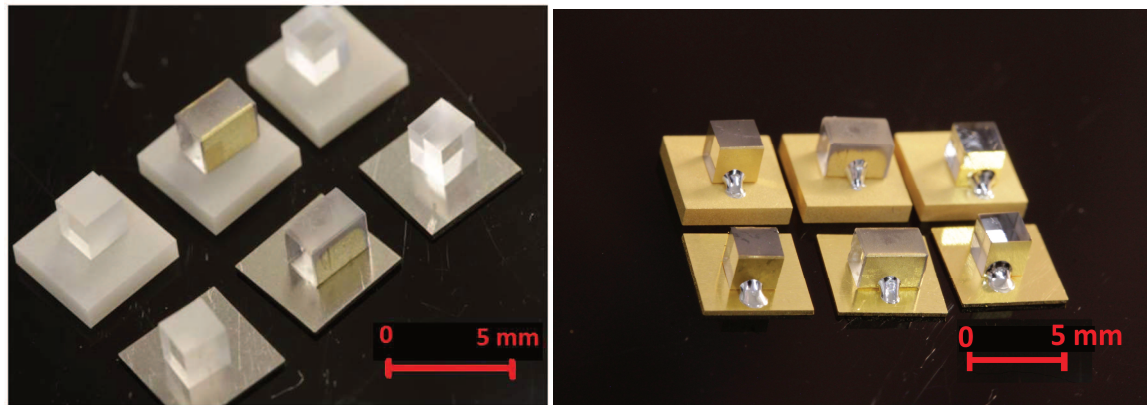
Detail of manufactured AIN (back) and KOVAR (front) baseplates and laser components with the same configuration as shown on Fig. 3.2 (YAG-BBO-FS). Left, components before metallization and soldering processes. Right, soldered components to baseplates.
